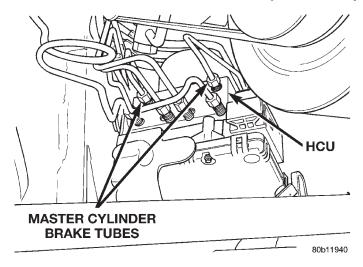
Master Cylinder Brake Tube Connections To HCU
